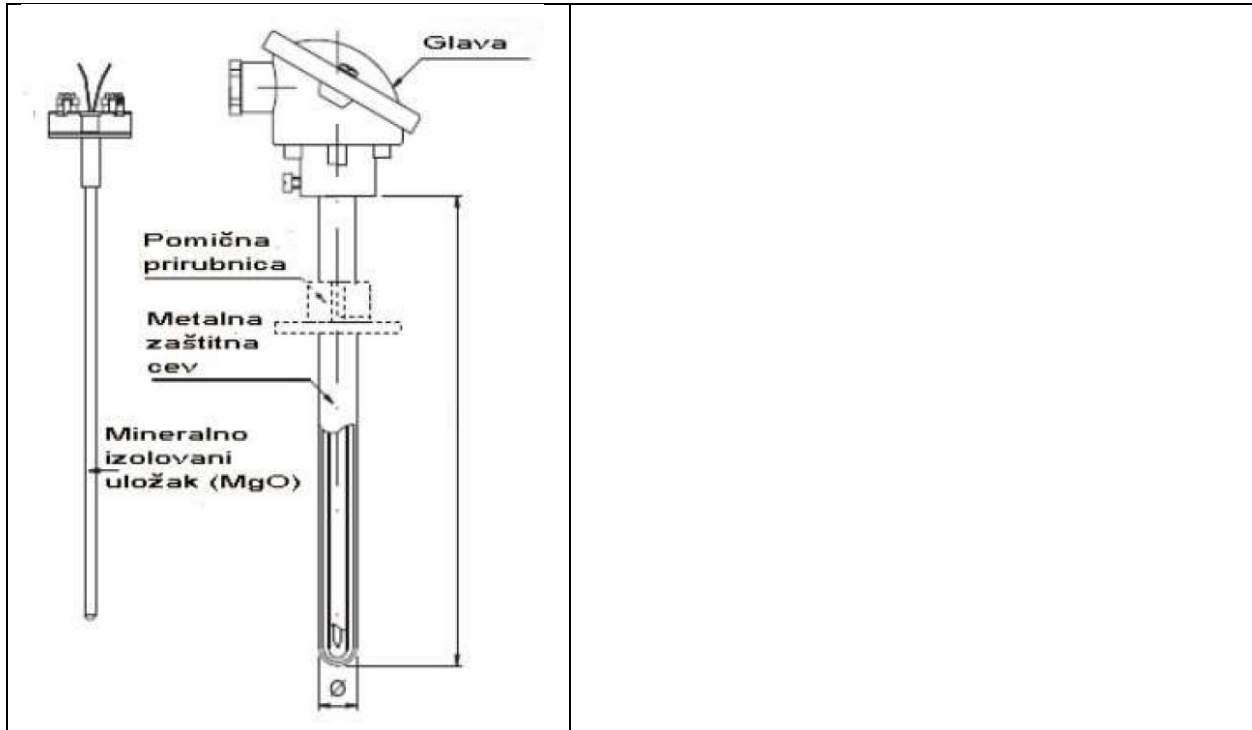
Parts of Group T4- thermoelements (Head/Movable flange/Metal protection tube/ Mineral insulated insert (MgO))
